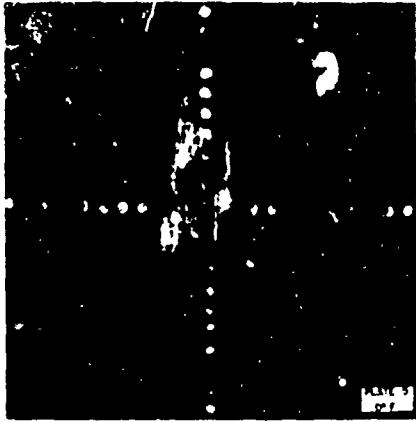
Explosion Bulge Plates from SMAW-50Kj Weldment
